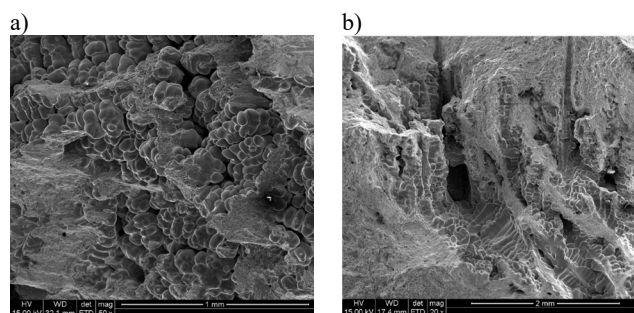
,b. Fractography images of a part of specimen rupture surface, subjected to uniaxial tensile tests – areas containing the internal surface of the shrinkage cavity: (a) specimen 21P-1 and (b) specimen 31P-2
